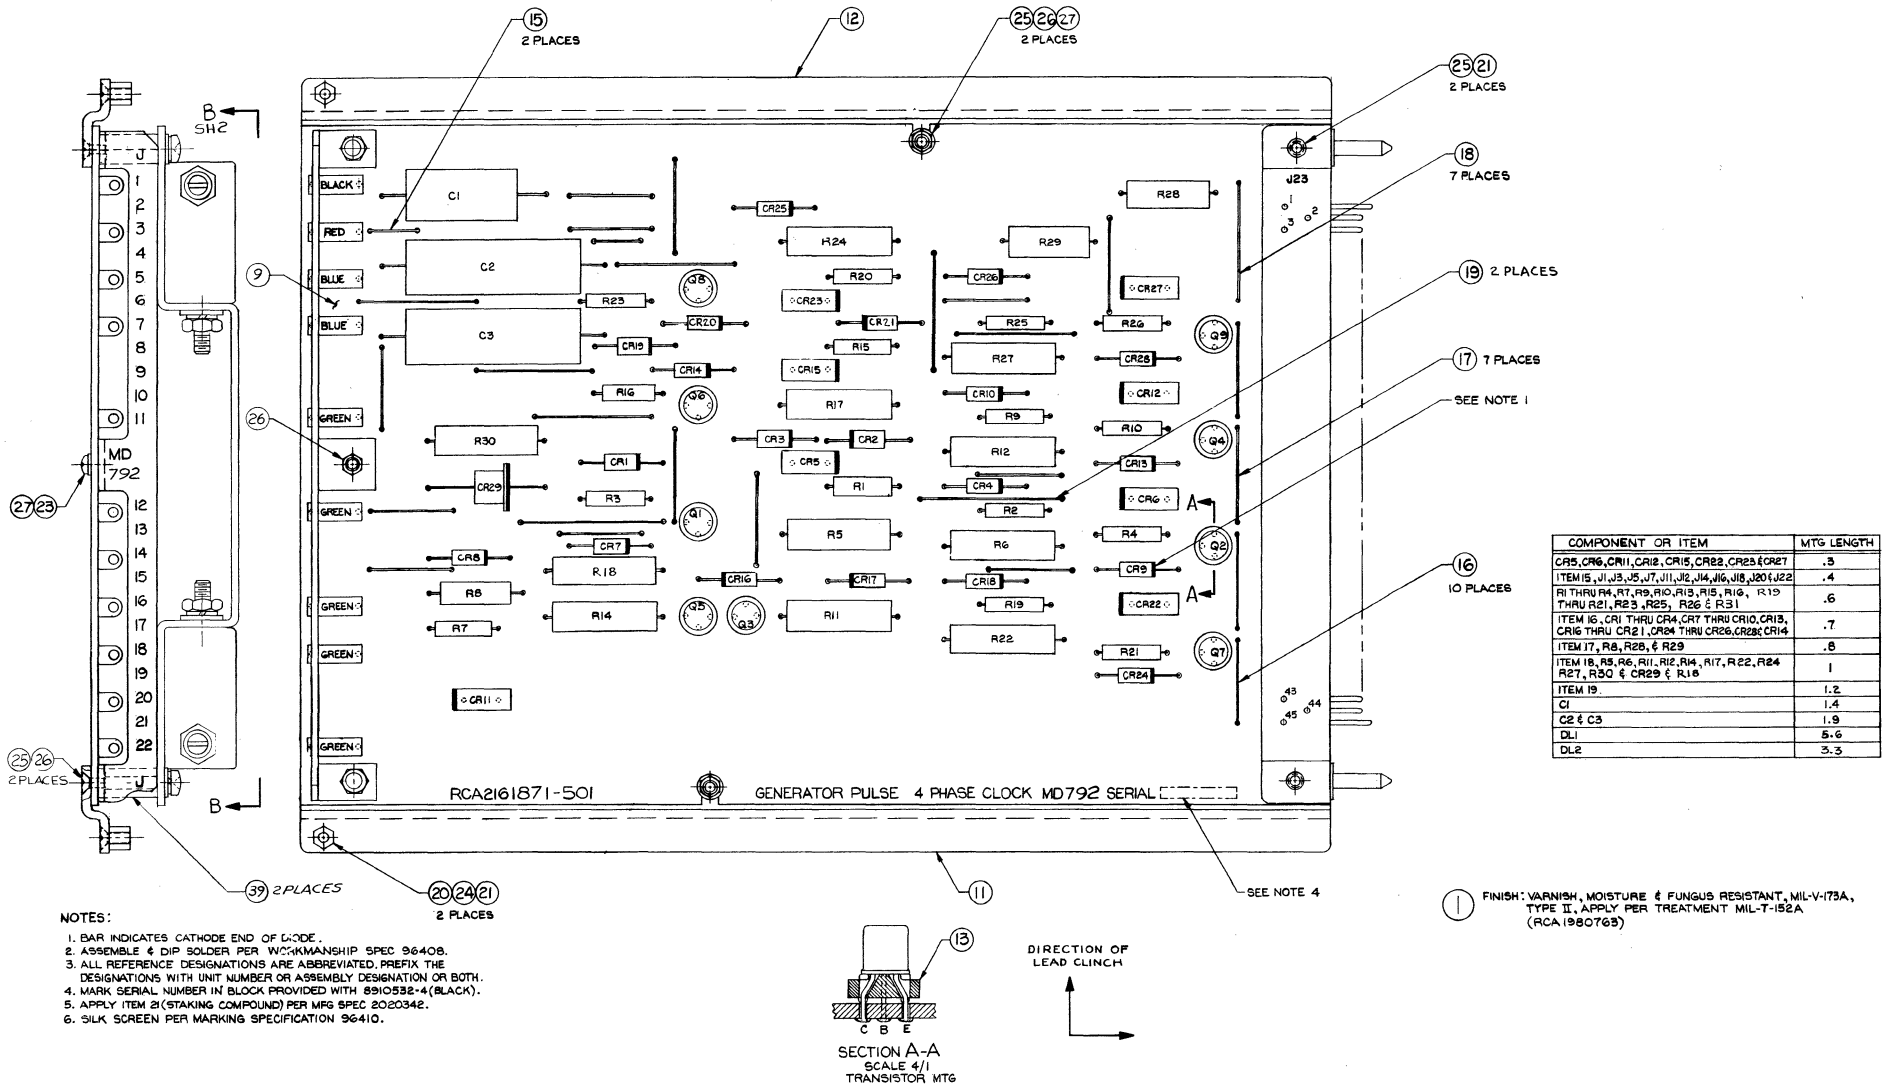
4-Phase Clock (Module MD792), Assembly Drawing (Sheet 1 of 2)
